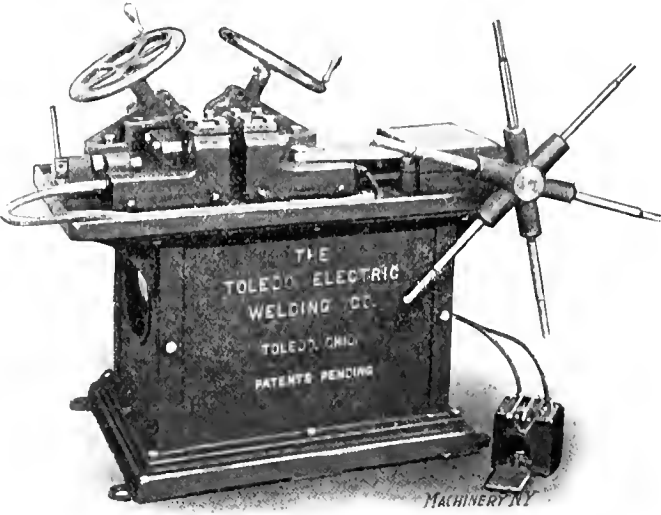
Machine for Welding Tubing and Solid Stock of Large Sizes
